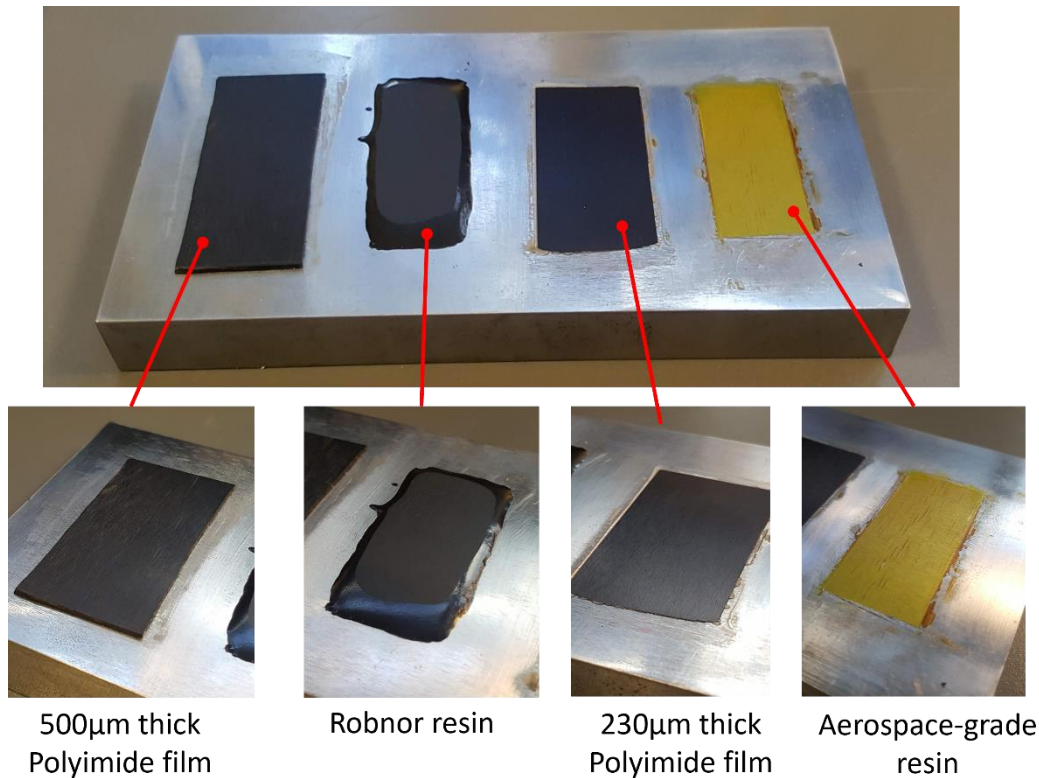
A photograph showing the different surface coating materials after grinding.
